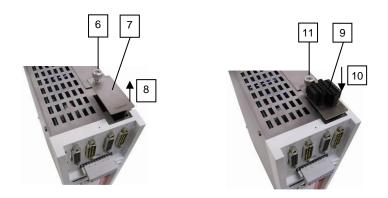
AX5801 - TwinSAFE Drive Option card
